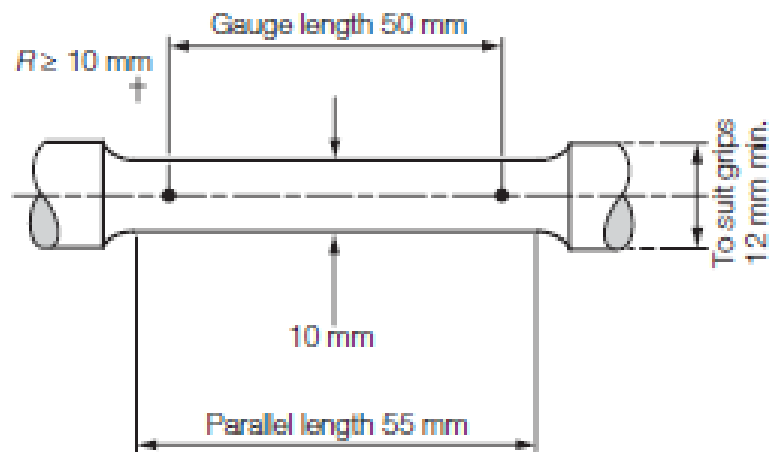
Test specimen dimension for deposited weld metal tensile
